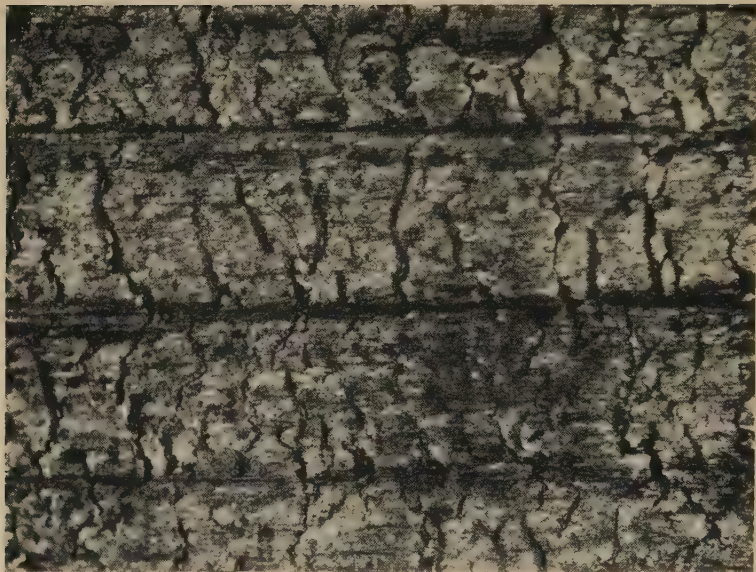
Rough machined surface, showing cracks perpendicular to path of tool. $\times 12$.
